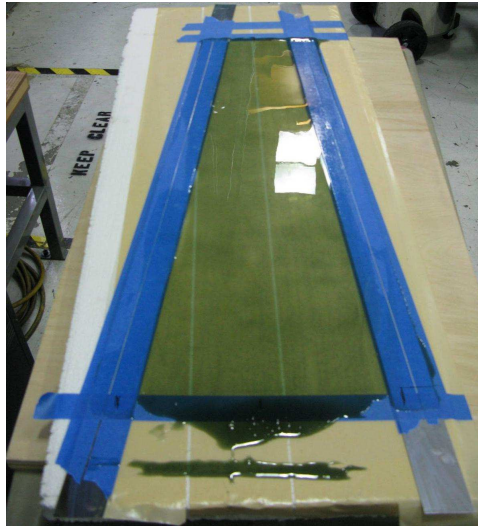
Polythene sheet with isolating tape which create a facing mould. This structure is used to contain the glue where the honeycomb will be immersed.
